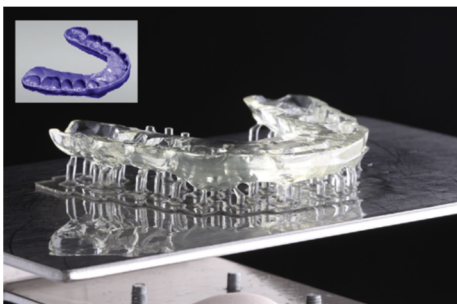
Occlusal device from layer 1 to 116 obtained by additive manufacturing technique using hard resin, Virtual view (inset) [23].
